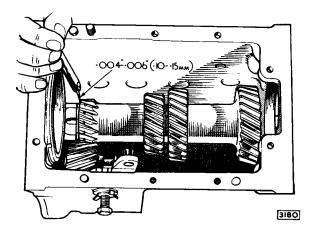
Checking the clearance between the rear thrust washer and the countershaft gear cluster.
